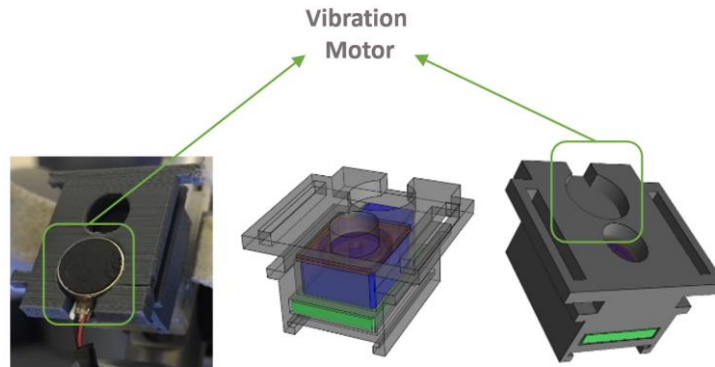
Vibration Motors Installed on 3D Printed Pneumatic Actuators
